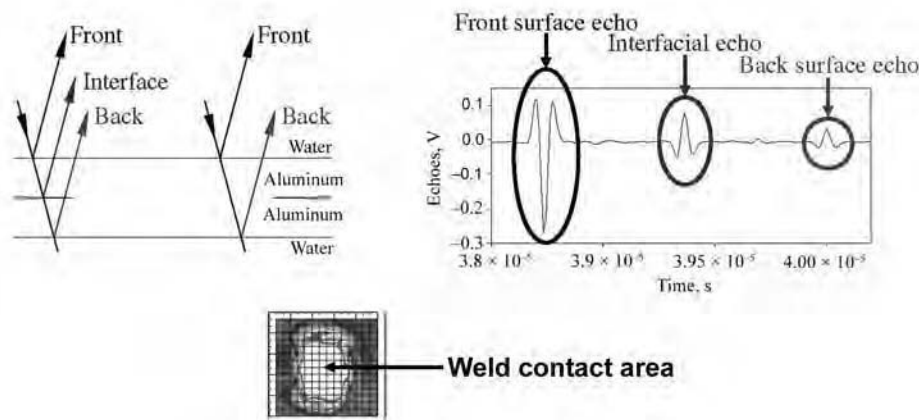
Nondestructive testing using magnitude of ultrasound interface echo to measure weld contact area as an indication of weld quality
